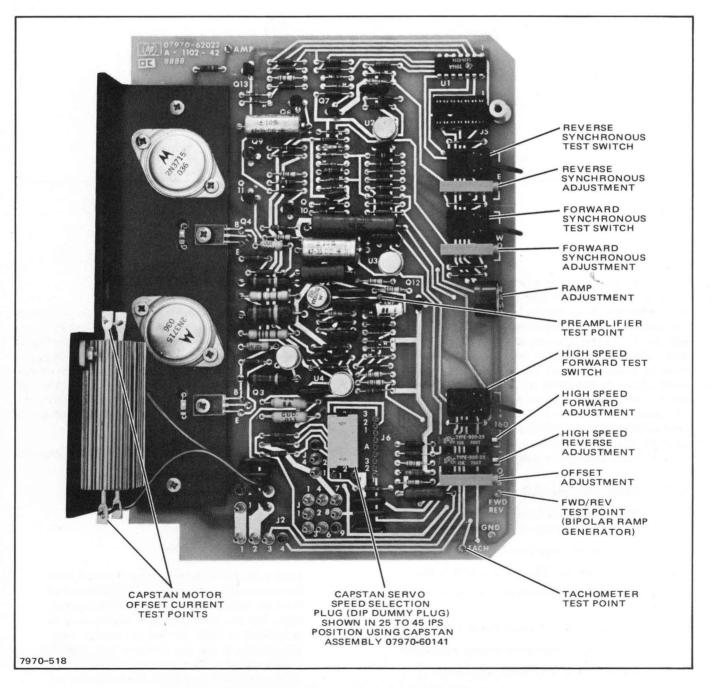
Capstan Servo PC Assembly, Test Points and Adjustments
